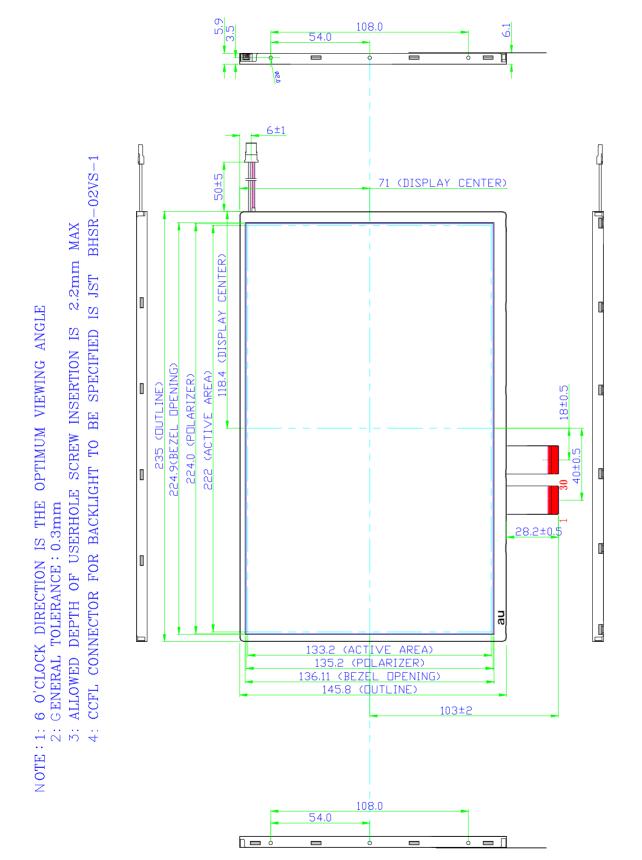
Outline dimension of TFT-LCD module (Front Side)
